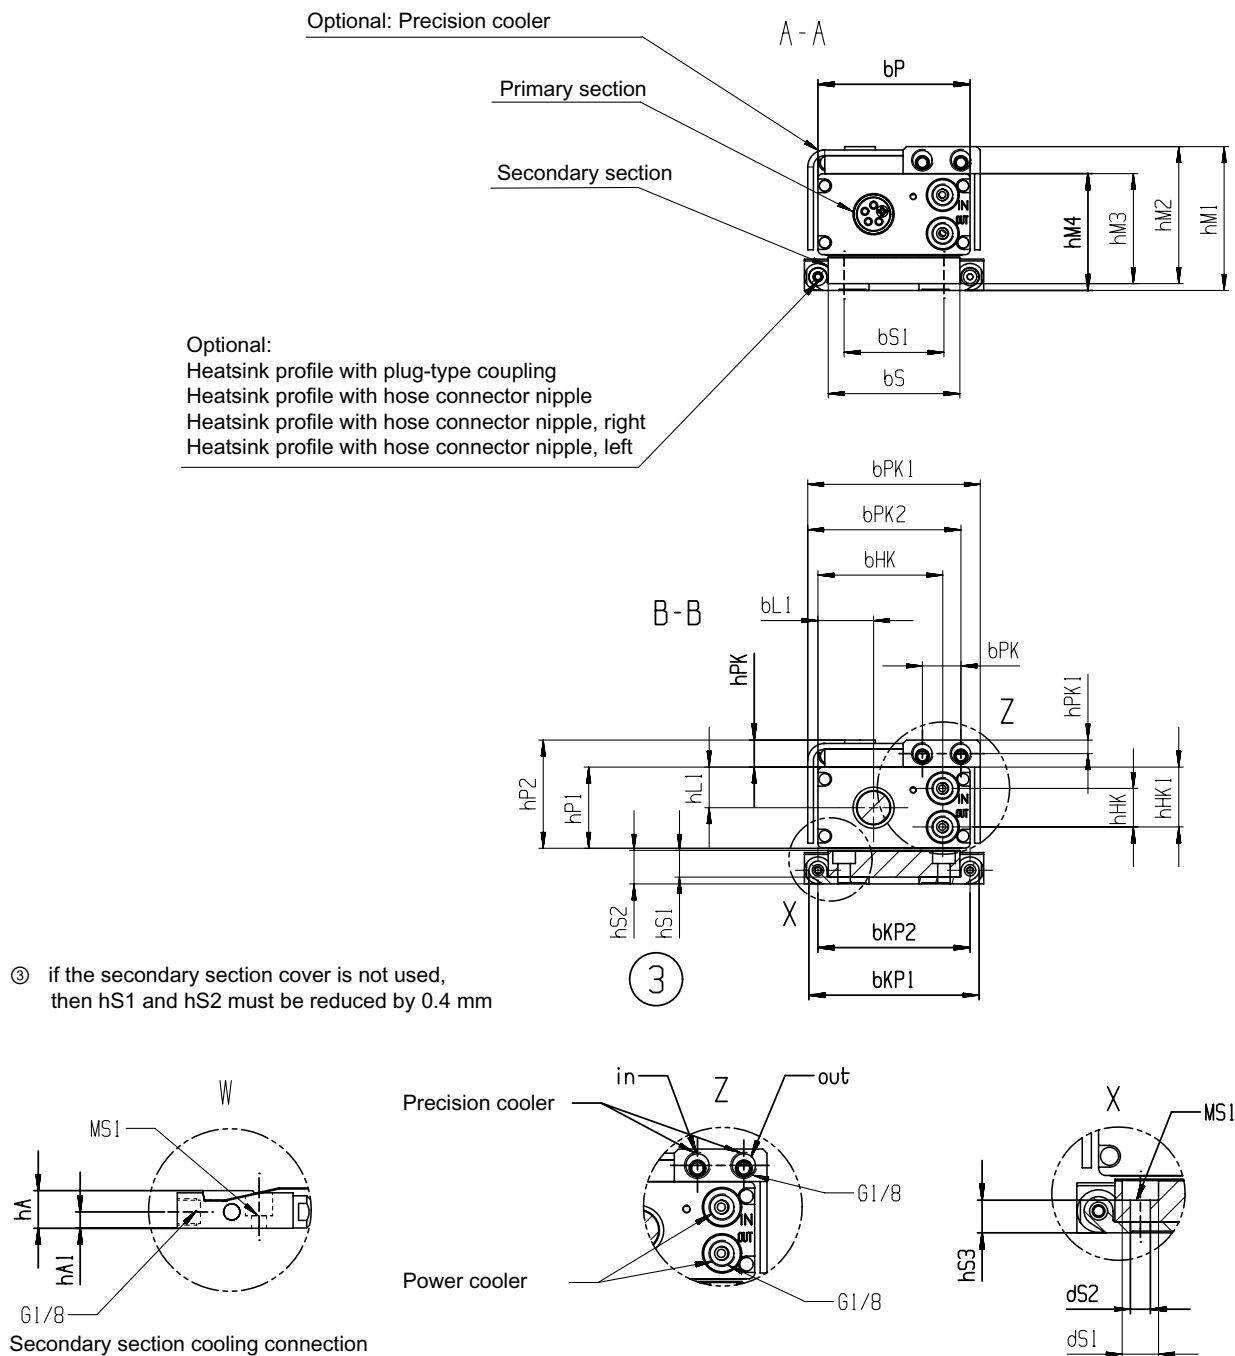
Installation dimensions for the 1FN3050 motor with one cable connection (cross sections and details)
